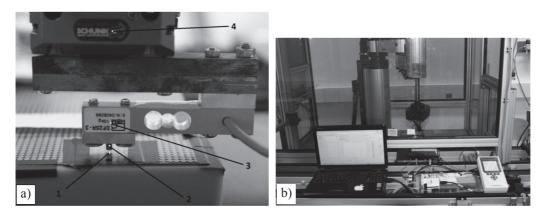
a) Detailed view on the measuring head, b) Layout of the robotized measuring post.
